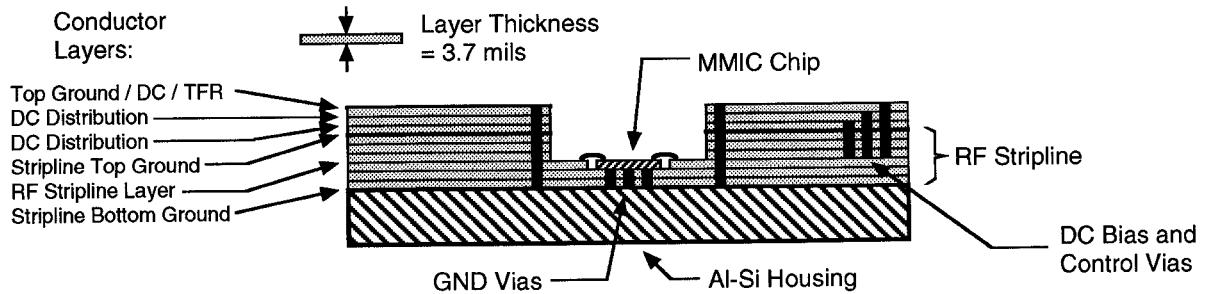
LTCC Layer Stack-Up for Downconverter Assembly.
